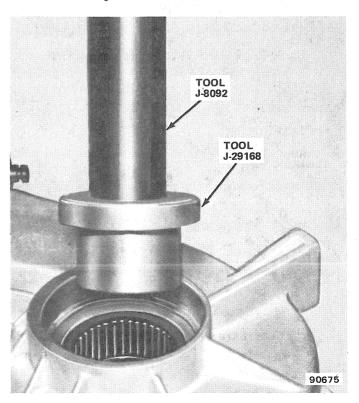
D-27 Front Output Shaft Front Bearing Removal
